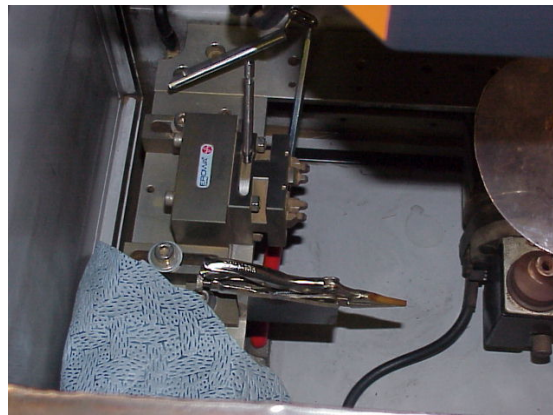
Modified vice grips used to secure small pieces to the EDM machining table.
